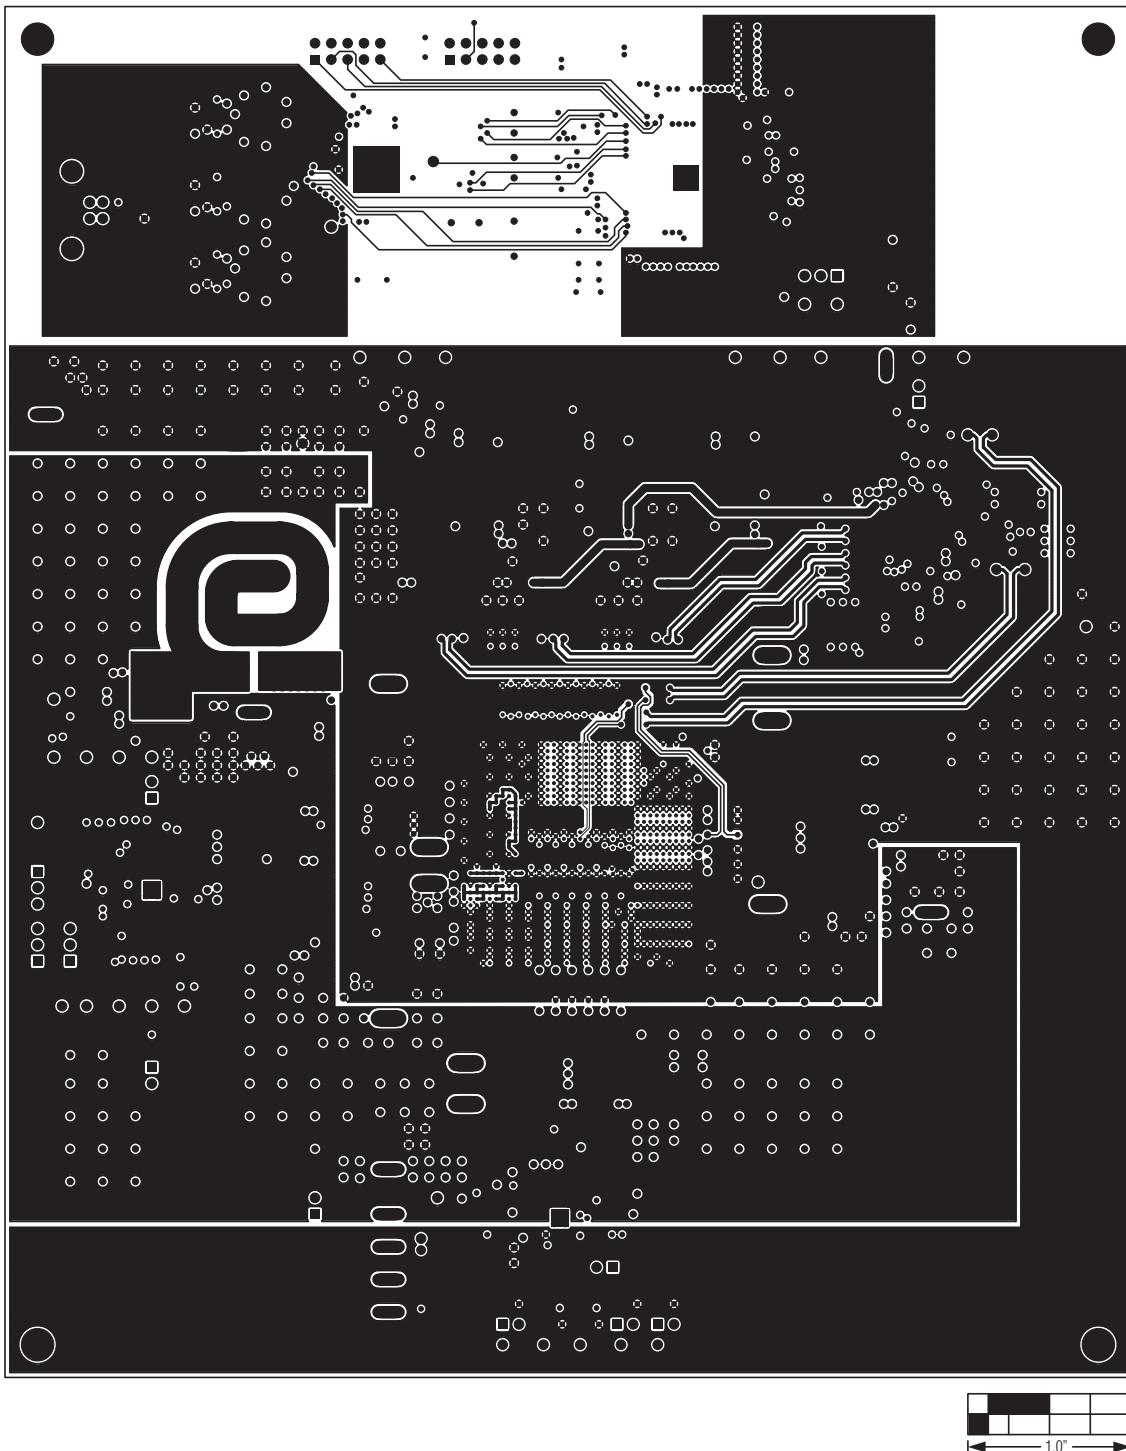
MAX17039 EV Kit PCB Layout—Internal Layer 5 (PGND Layer)
